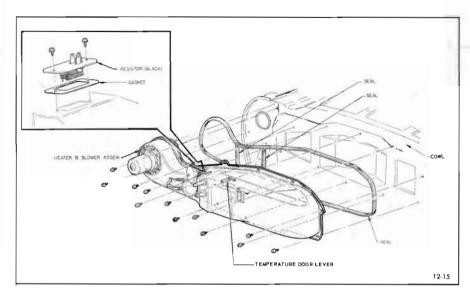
Blower and Heater Assembly Installation - 49000 Series
